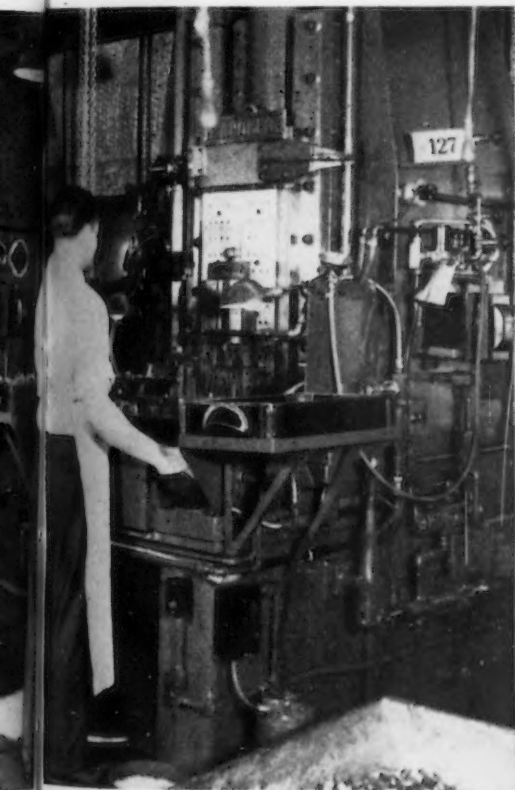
Surface grinder equipped with Bijur "one-shot" automatic lubrication by I.B.M.
